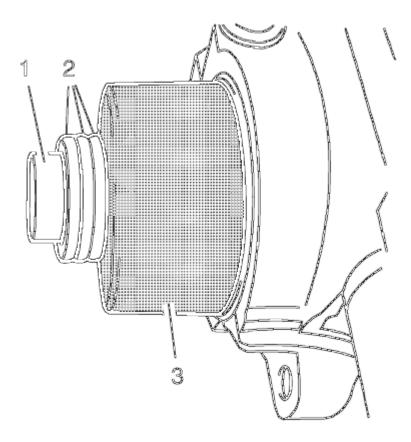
Camshaft Sprocket Bolt, Shims And Tool Courtesy of GENERAL MOTORS COMPANY
